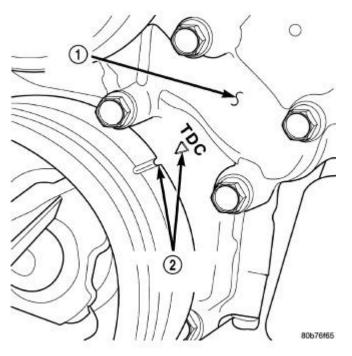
Engine Top Dead Center Courtesy of CHRYSLER LLC
